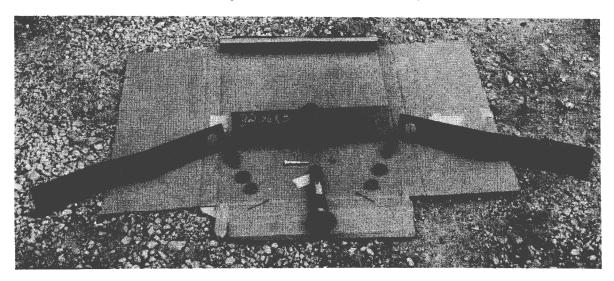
Exploded view of the parts that made up the brush-cutting mechanism of the rotary brushcutter used in this study. The blades are 22 inches long and 3 inches wide. The carrier, which measures 20 by 3½ inches, is made up of two such lengths between which fit the ends of the two cutting blades. The drive shaft fits into the splined hole in the carrier and extends above the heavy steel enclosure, where the bevel gear is connected with the power take-off of the tractor.
